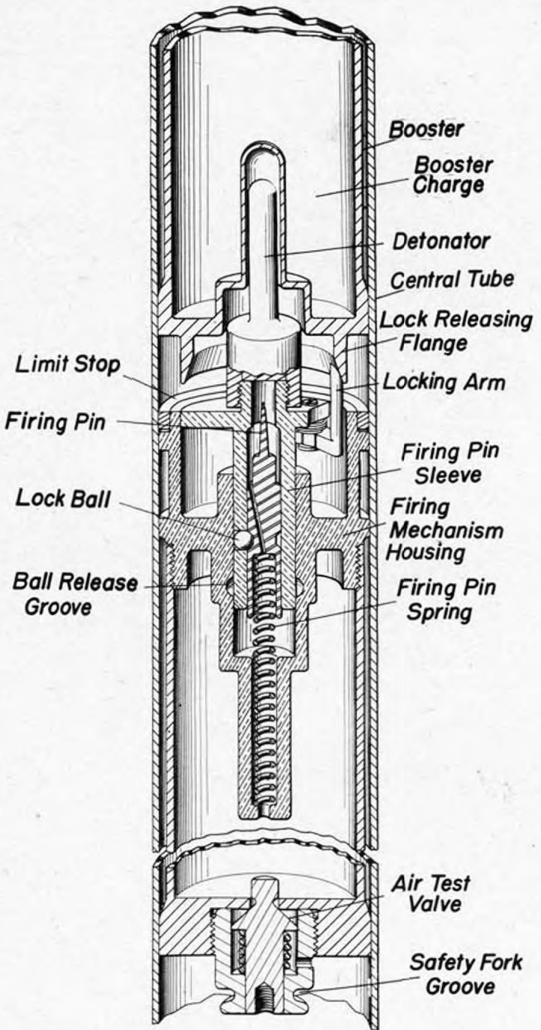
Type 95 Depth Charge Pistol, Sectional View
